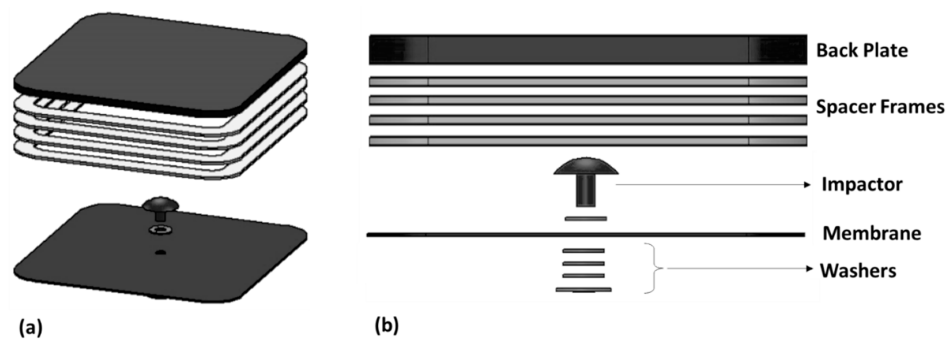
(a) Exploded and (b) component views of the CAD model for the MIVIS test article.
